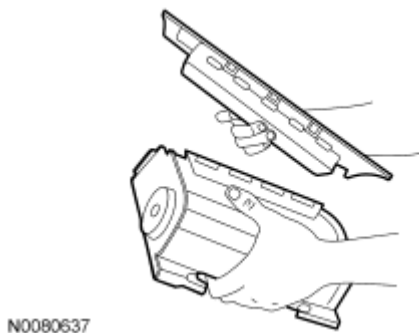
Removing Passenger Air Bag Cover From Canister & Separating Top Windows From
